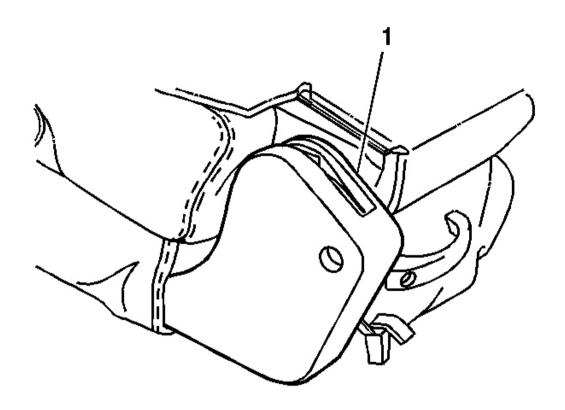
Seat Latch Cover Courtesy of GENERAL MOTORS CORP.
